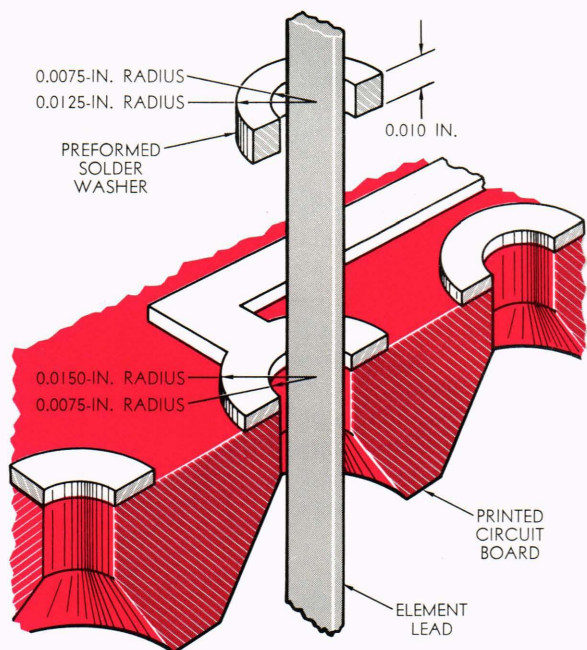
Cutaway view of a typical solder-joint assembly, showing printed-circuit-board lands and preformed solder washers.
